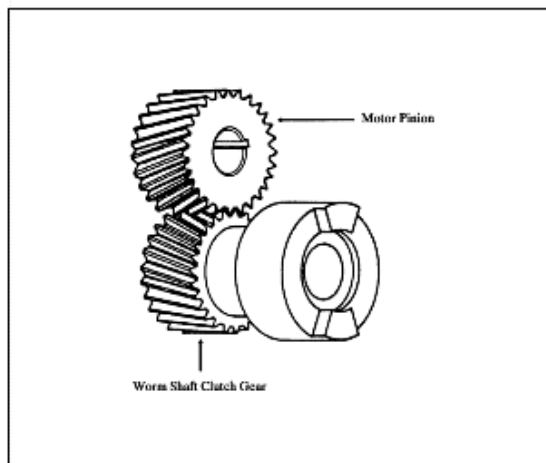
SMB/SB-0 Worm Shaft Clutch Gear
